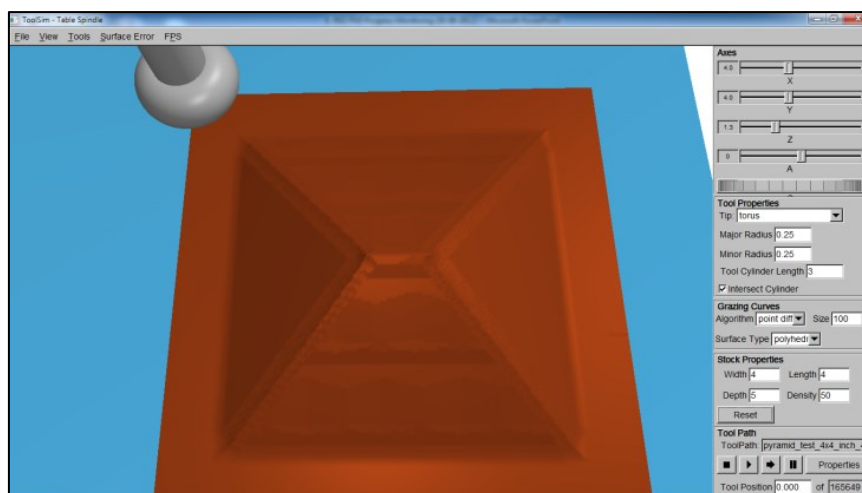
Machining simulation of faceted pyramid model machine with 3-axis vertical toolpath with toroidal end mill ($R_t = R_o = 6.35$ mm) using the edge-torus tangency model of Chuang et al. [33].
